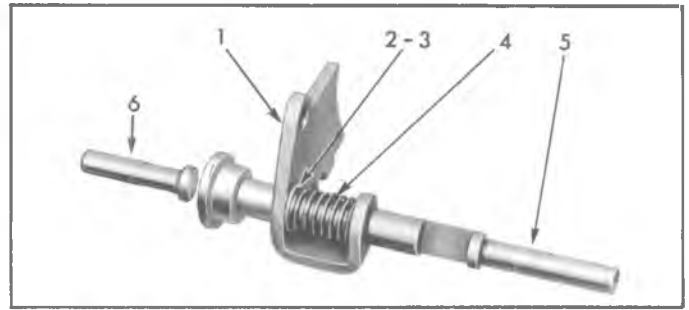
B—Shift Rail, Plunger, Fork and Spring Assembly
